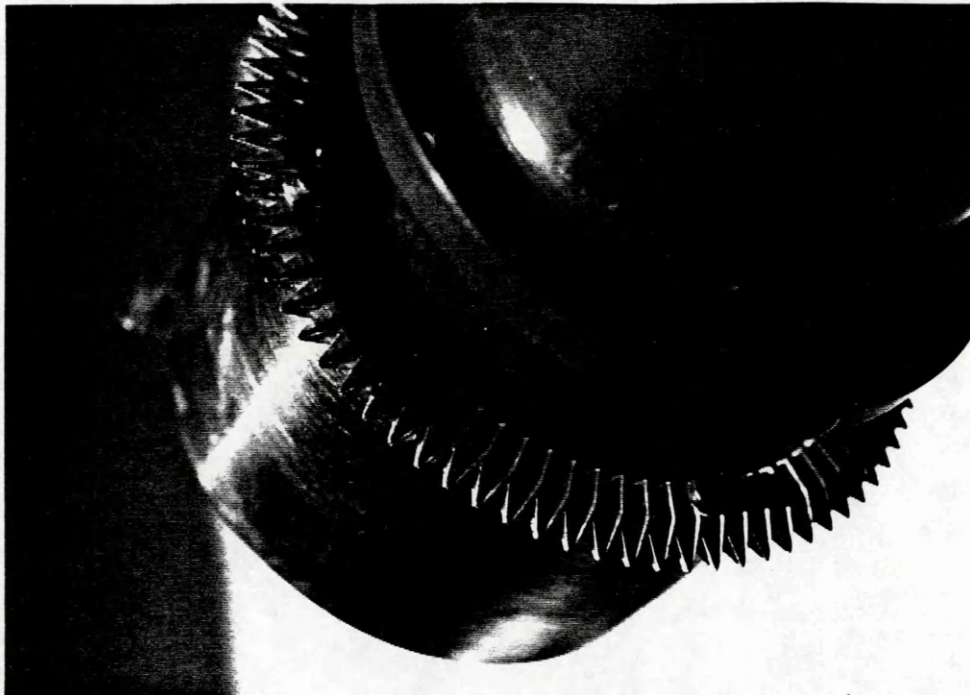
Waterwheel Mk.7 showing fine tooth detail
